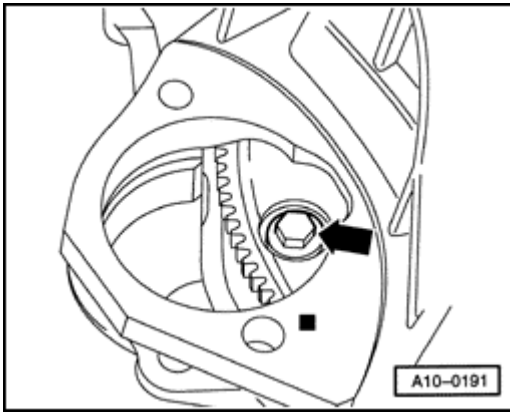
Removing Torque Converter Bolts Through Opening Of Removed Starter
